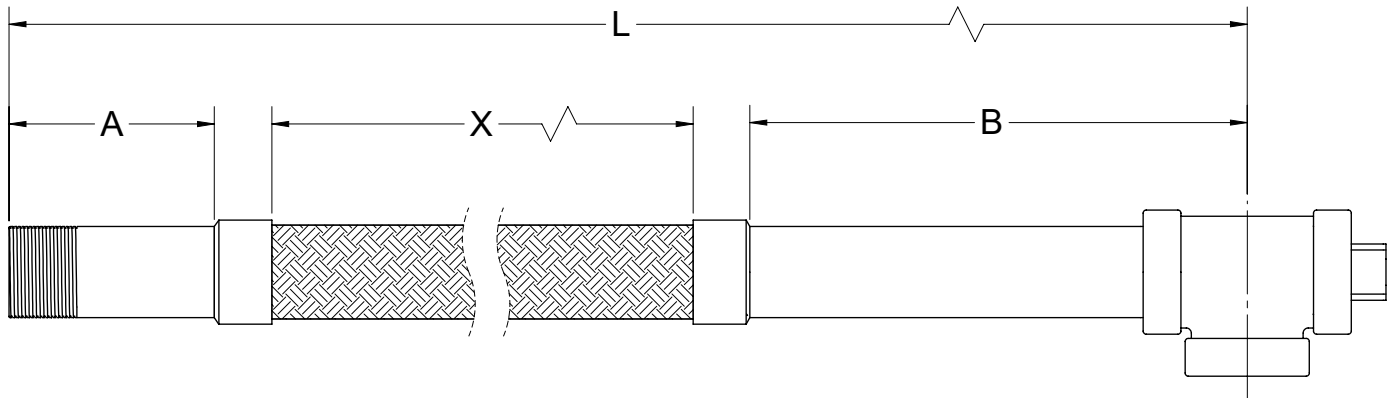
XXDT-DPS 1" Dimensions & Model Number
